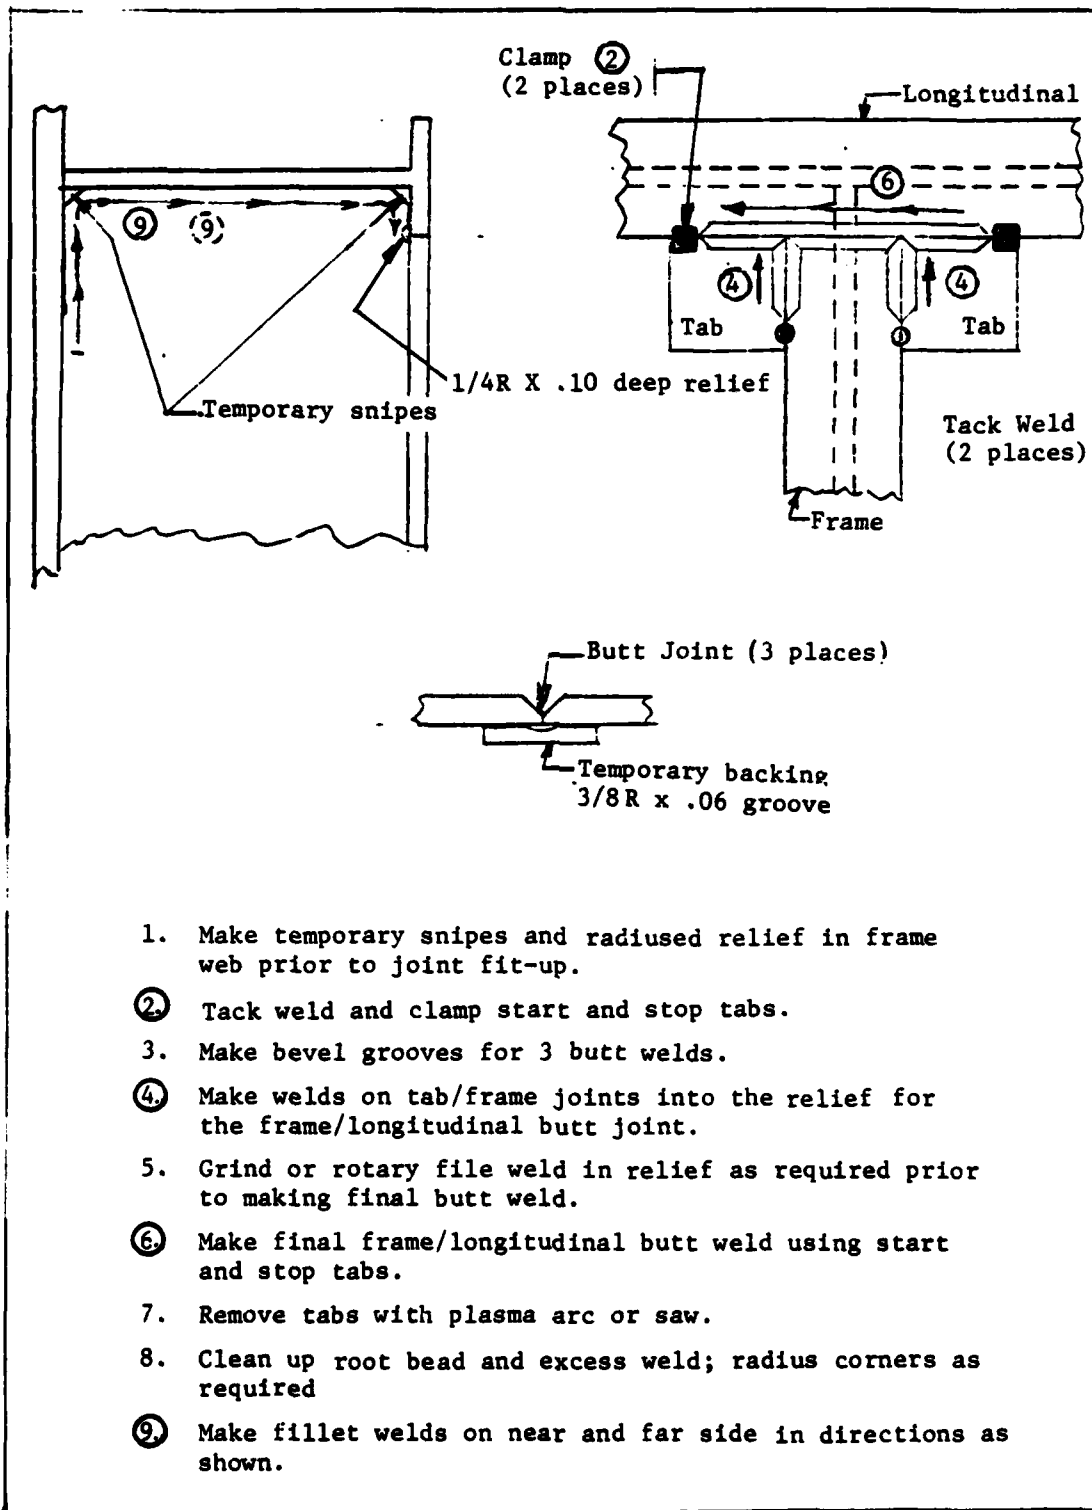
Joint Preparation and Welding Technique for Tee-to-Tee Intersections.
